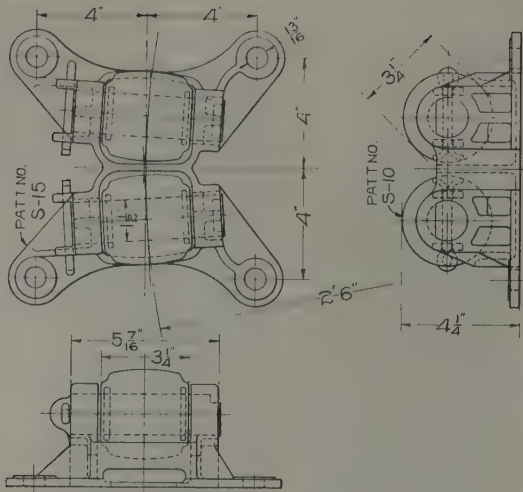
Economy Roller Side Bearing for New York Central Lines.
